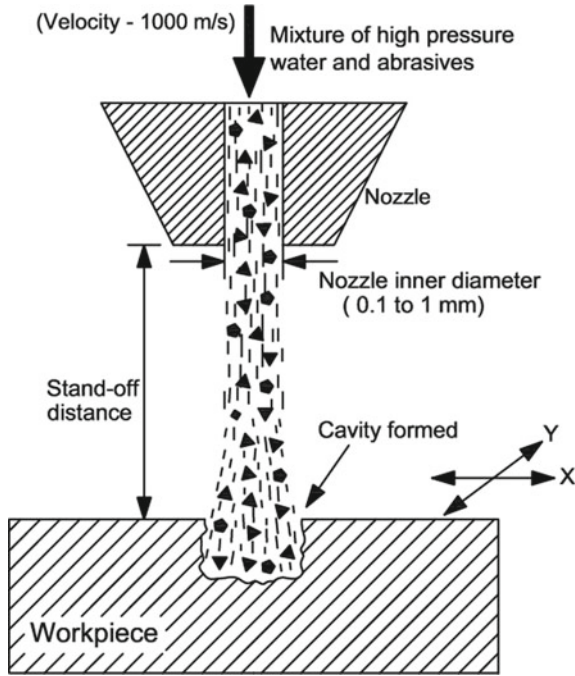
Schematic view of mechanism of material removal in AWJM
